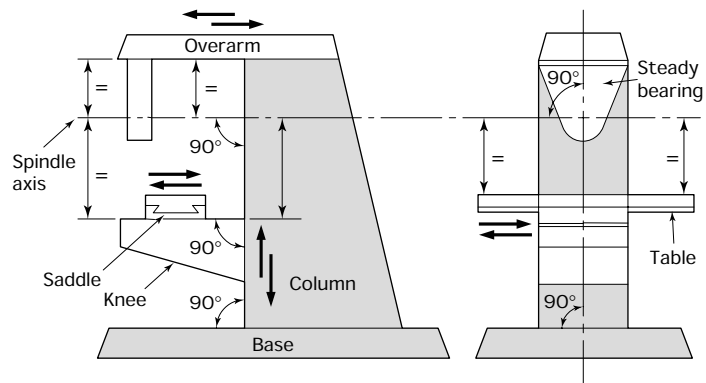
Horizontal spindle milling machine: movements and alignments
